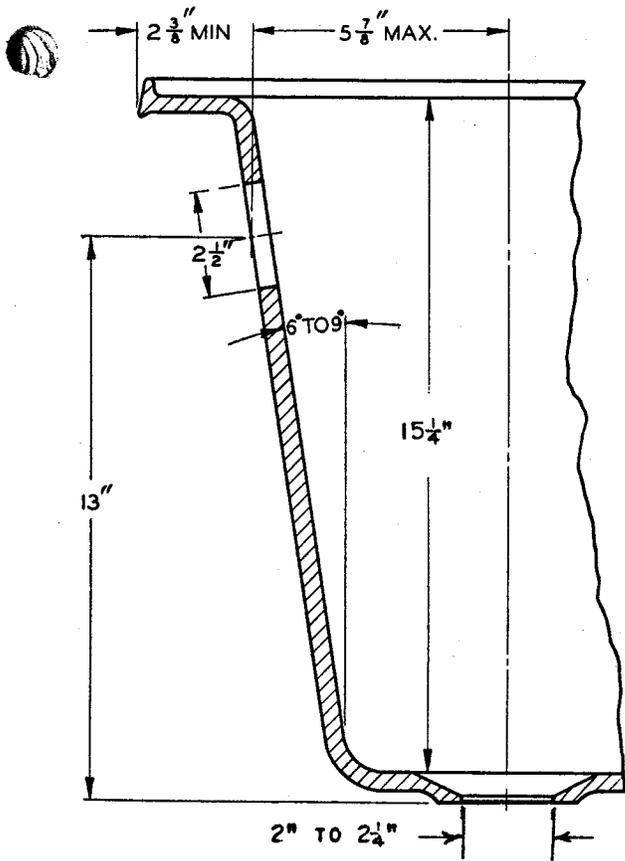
OUTLET AND OVERFLOW DIMENSIONS FOR 16" HEIGHT BATHTUBS. (REF. FIGS. 1 AND 2)
